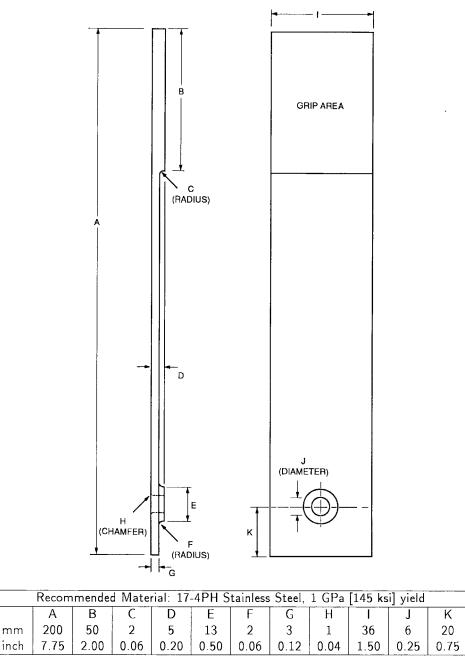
Fixture Loading Plate for Procedure A (2 Req'd)
